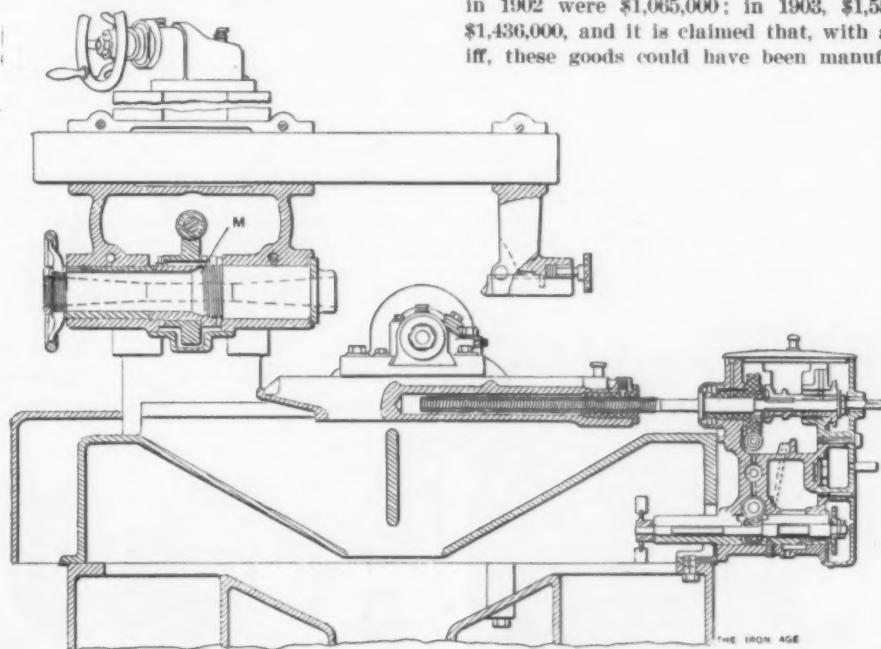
Sectional Detail of the Bed and Column from the Opposite Side.
